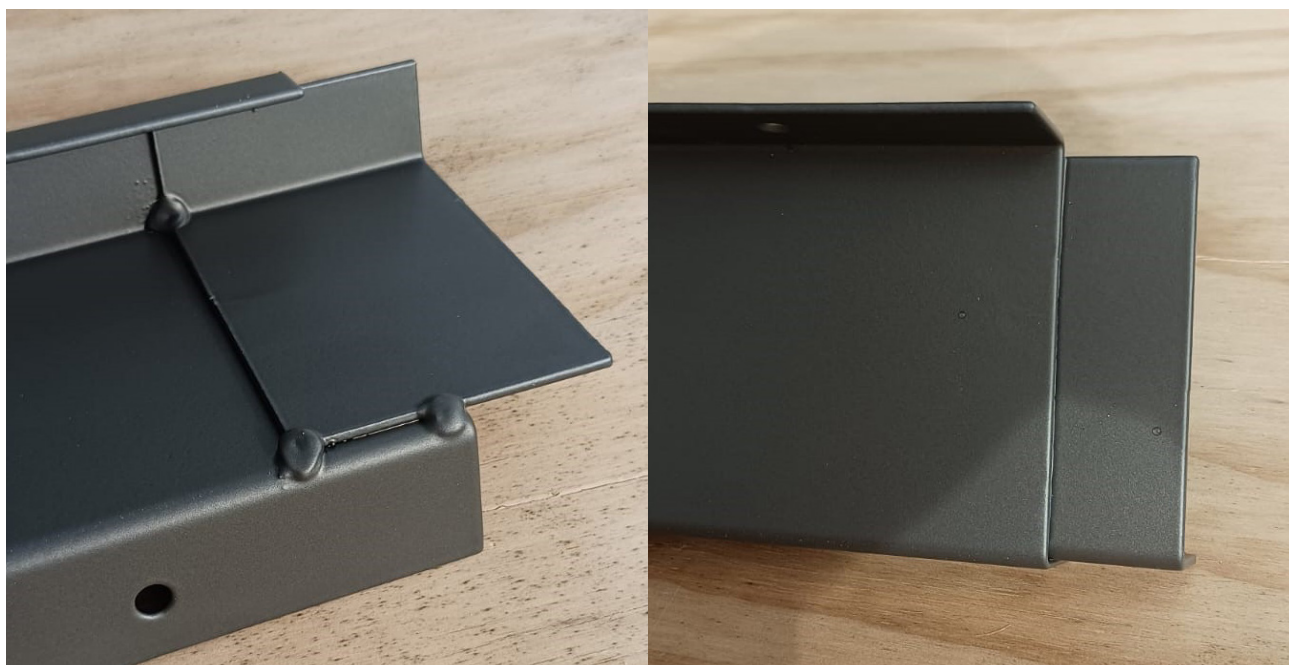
Welded couple piece to a water panel. Left: Bottom view. Right: Top view
